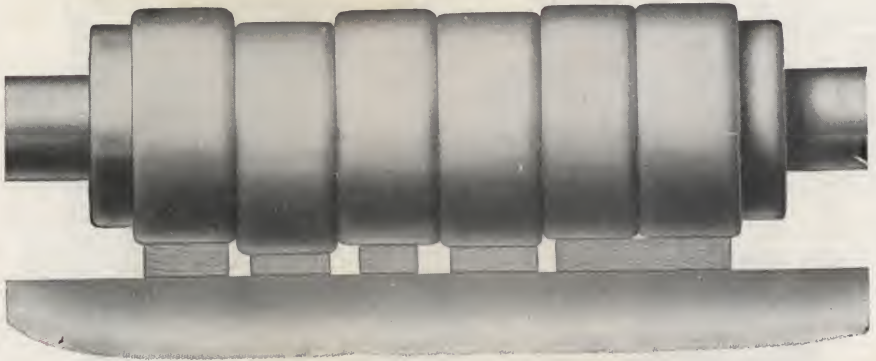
Philbrick 3" 6-knife Jointer Head. This is a 6-knife disc mounted on a Philbrick Universal self centering side head sleeve. Like all the moulding discs of this line this can be self centered to fit spindles up to 2 3/16" diameter.
